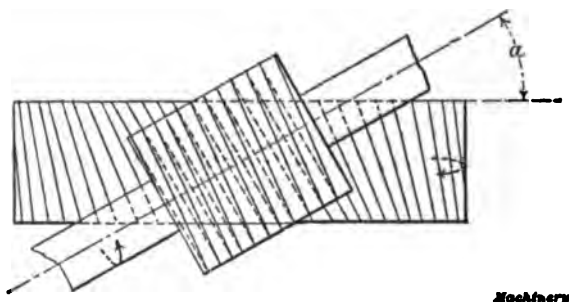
Cutting a Left-hand Spiral Gear with a Left-hand Hob
